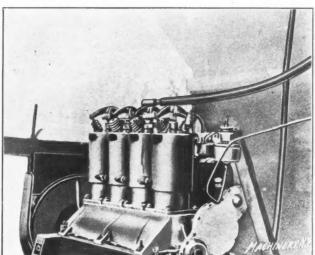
A Four-cylinder Aeroplane Motor under Brake Test
